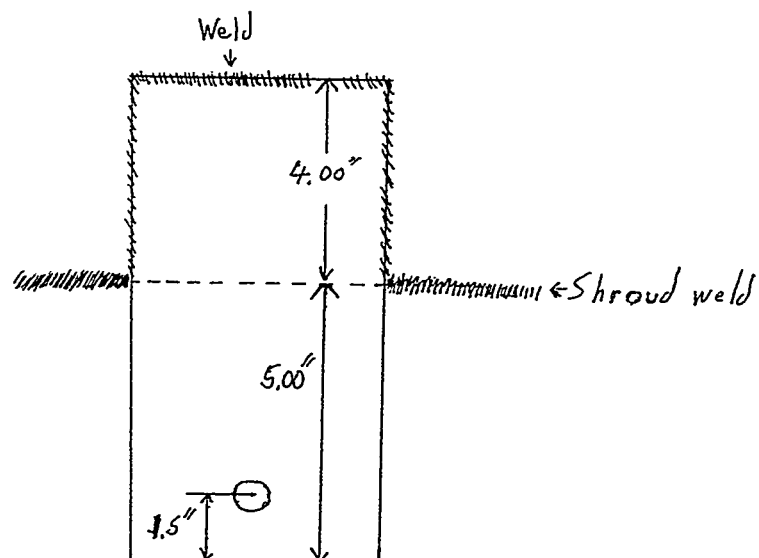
Placement of the Plate in Relation to the Shroud Weld
